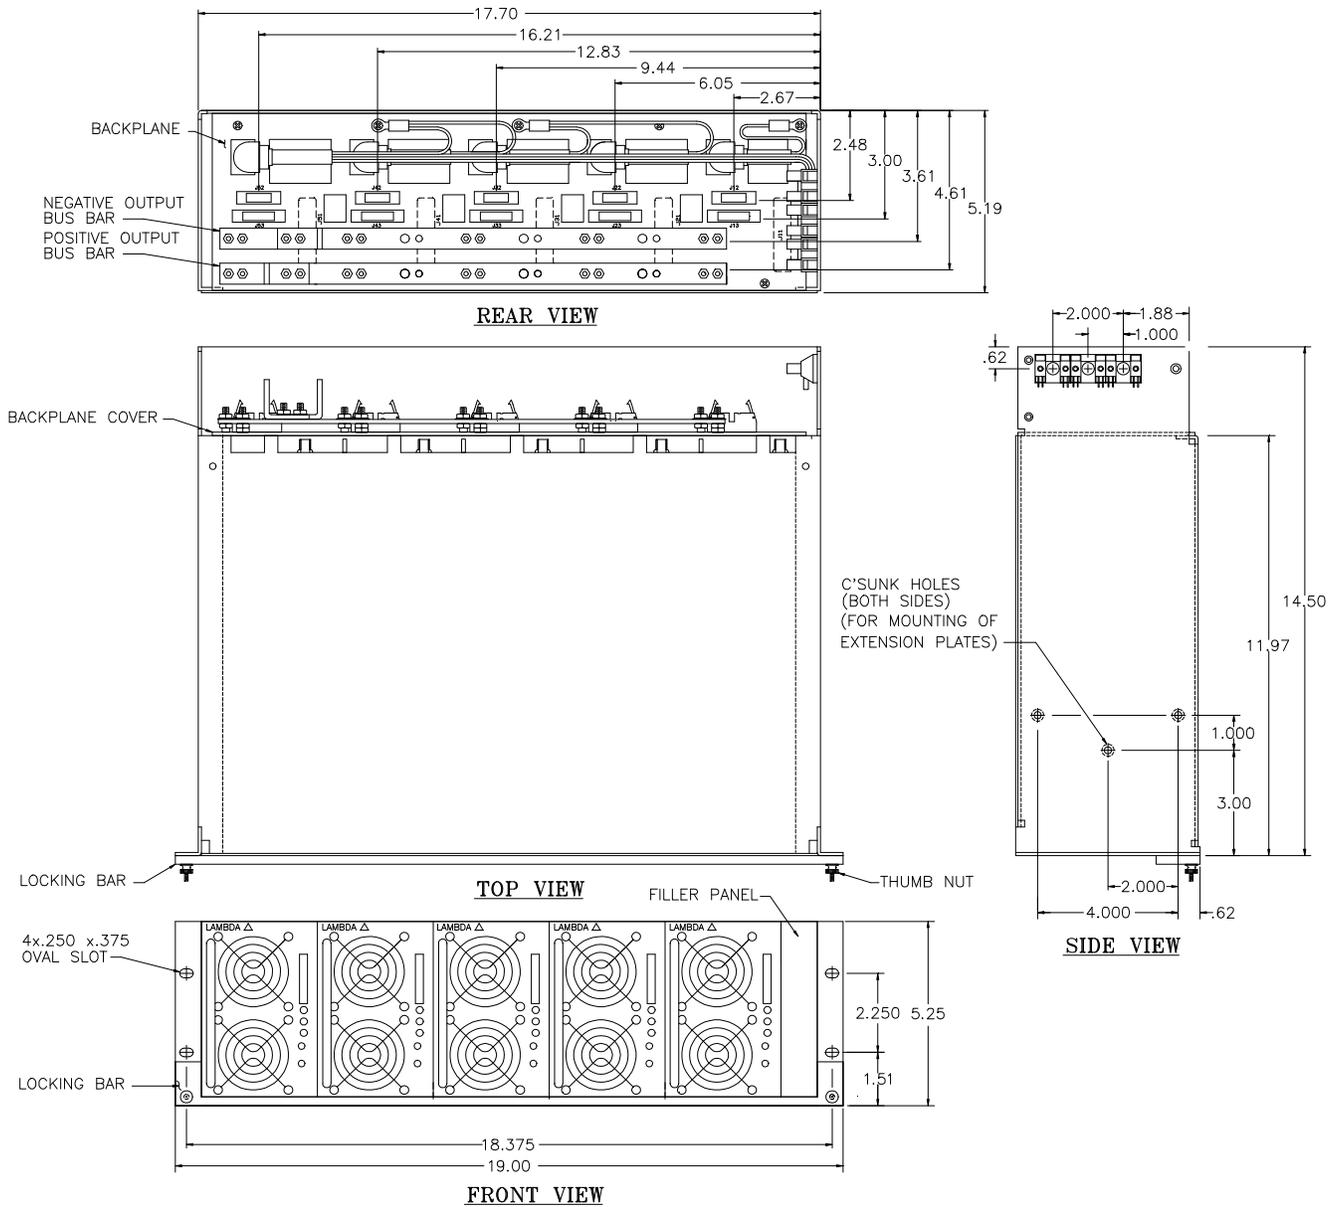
Outline Drawing of FE4K-XE Power Shelf
